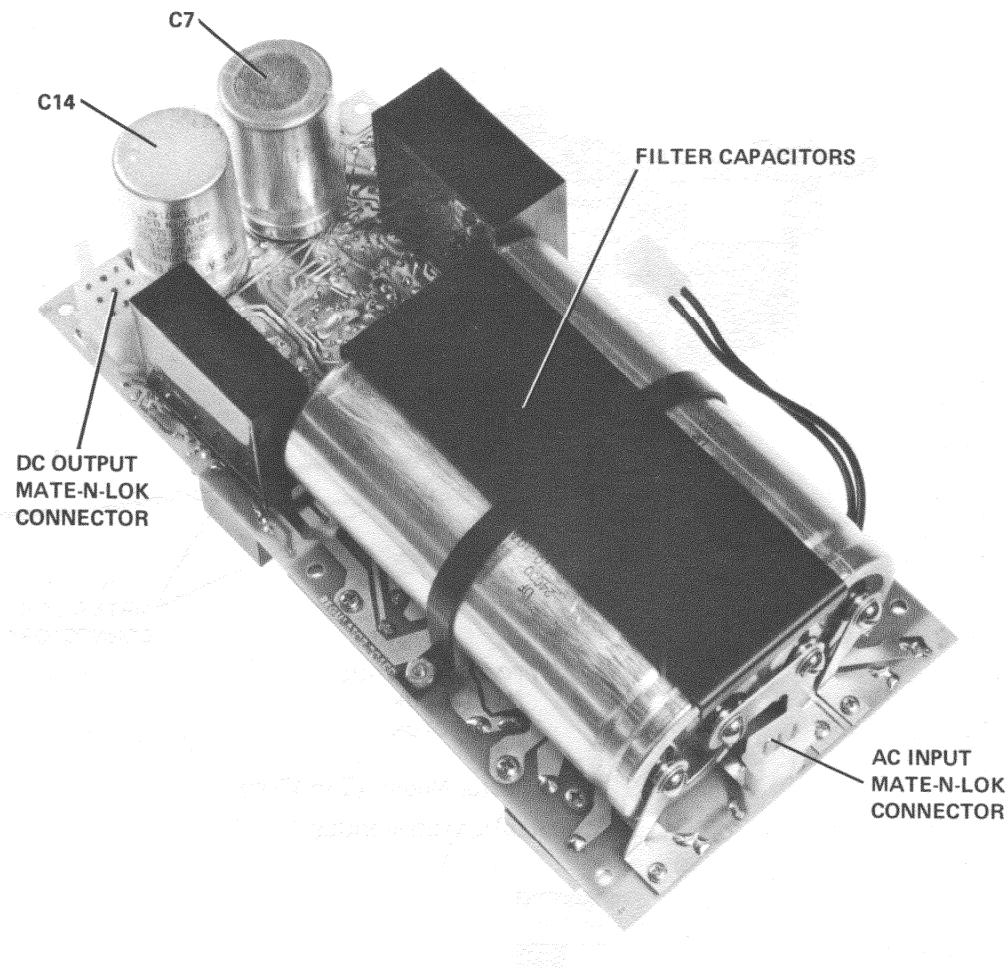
Power Supply Assembly (with DC Regulator Module Removed)
